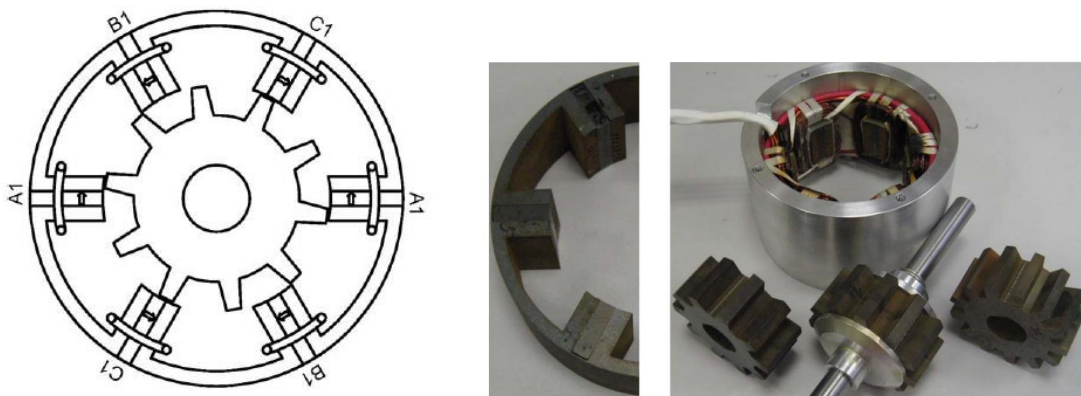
C-core flux-switching PM machine and one prototype [53], [116].
